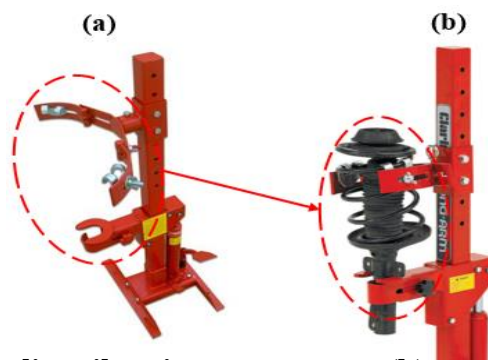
(a) Hydraulic coil spring compressor. (b) Tool in operation
